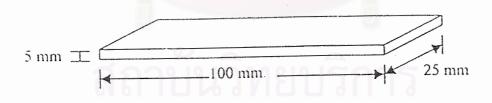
Dimension of specimen for flexure stress and MOE testing
